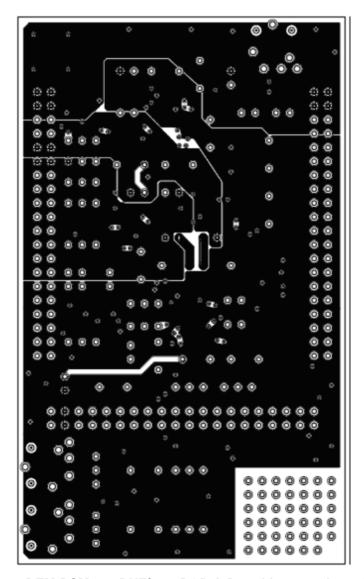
DEM-PCM1870RHF/1774RGP-A Board Layout—Inner Layer 3
